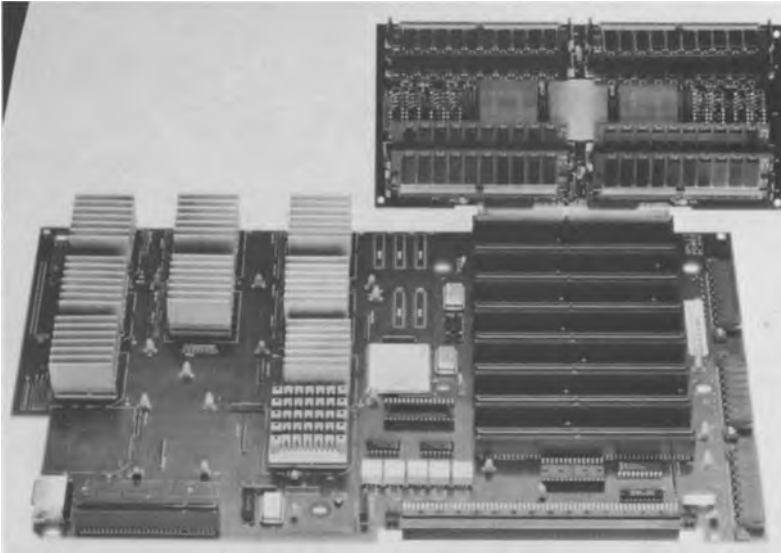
A workstation processor board with three dimensional memory board and large SCMs.
